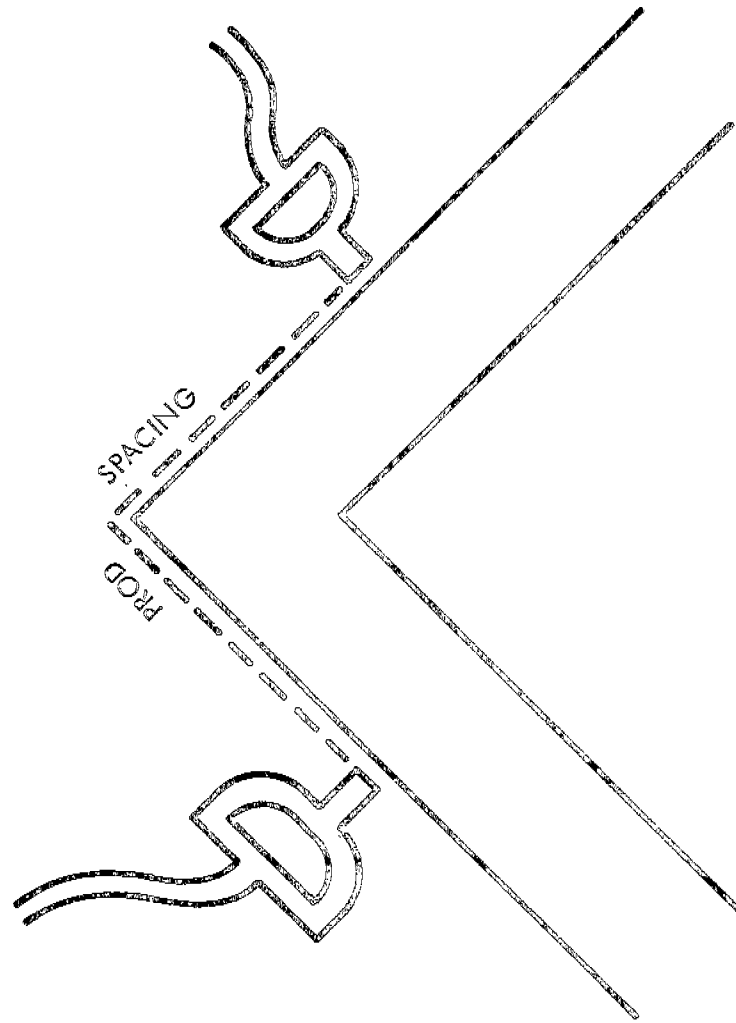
PROD POSITION FOR MAGNETIC PARTICLE INSPECTION OF A CORNER JOINT
